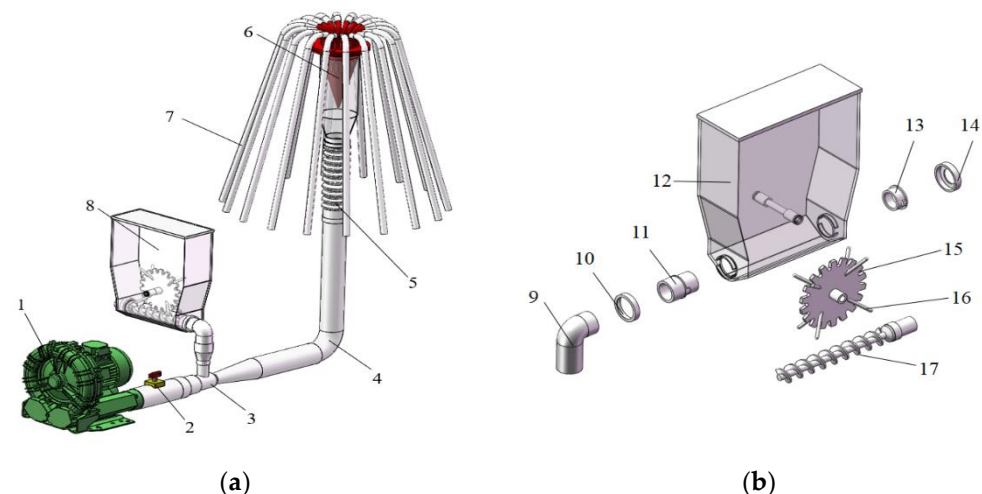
Alfalfa Pneumatic Collector: (a) General Assembly Diagram, and (b) Disassembly Diagram
